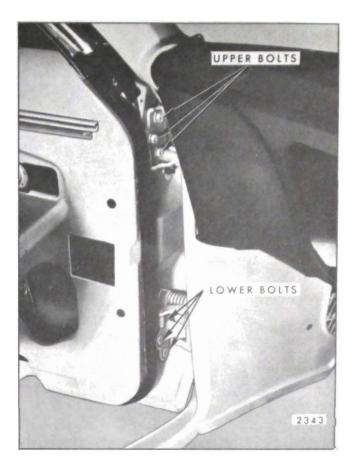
Front Door Hinge to Door Attaching Bolts - "F" Styles
